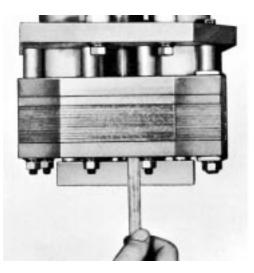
Checking for correct moving contact clearance between contact arm and fiber plate. (Reclosers below serial No. 1001)
